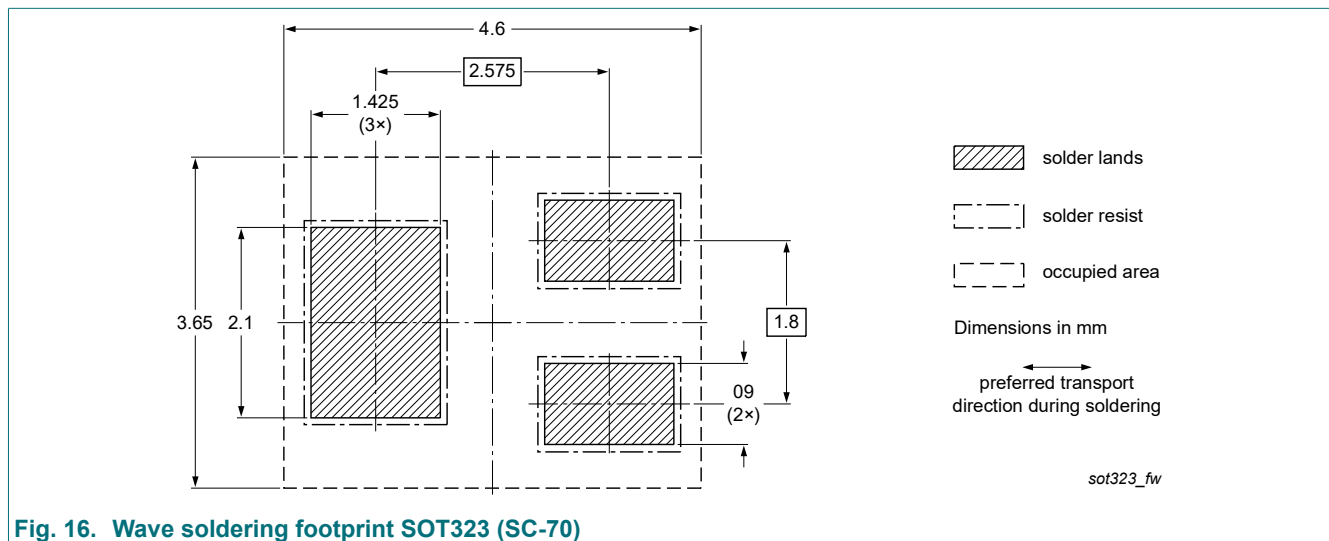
Wave soldering footprint SOT323 (SC-70)
